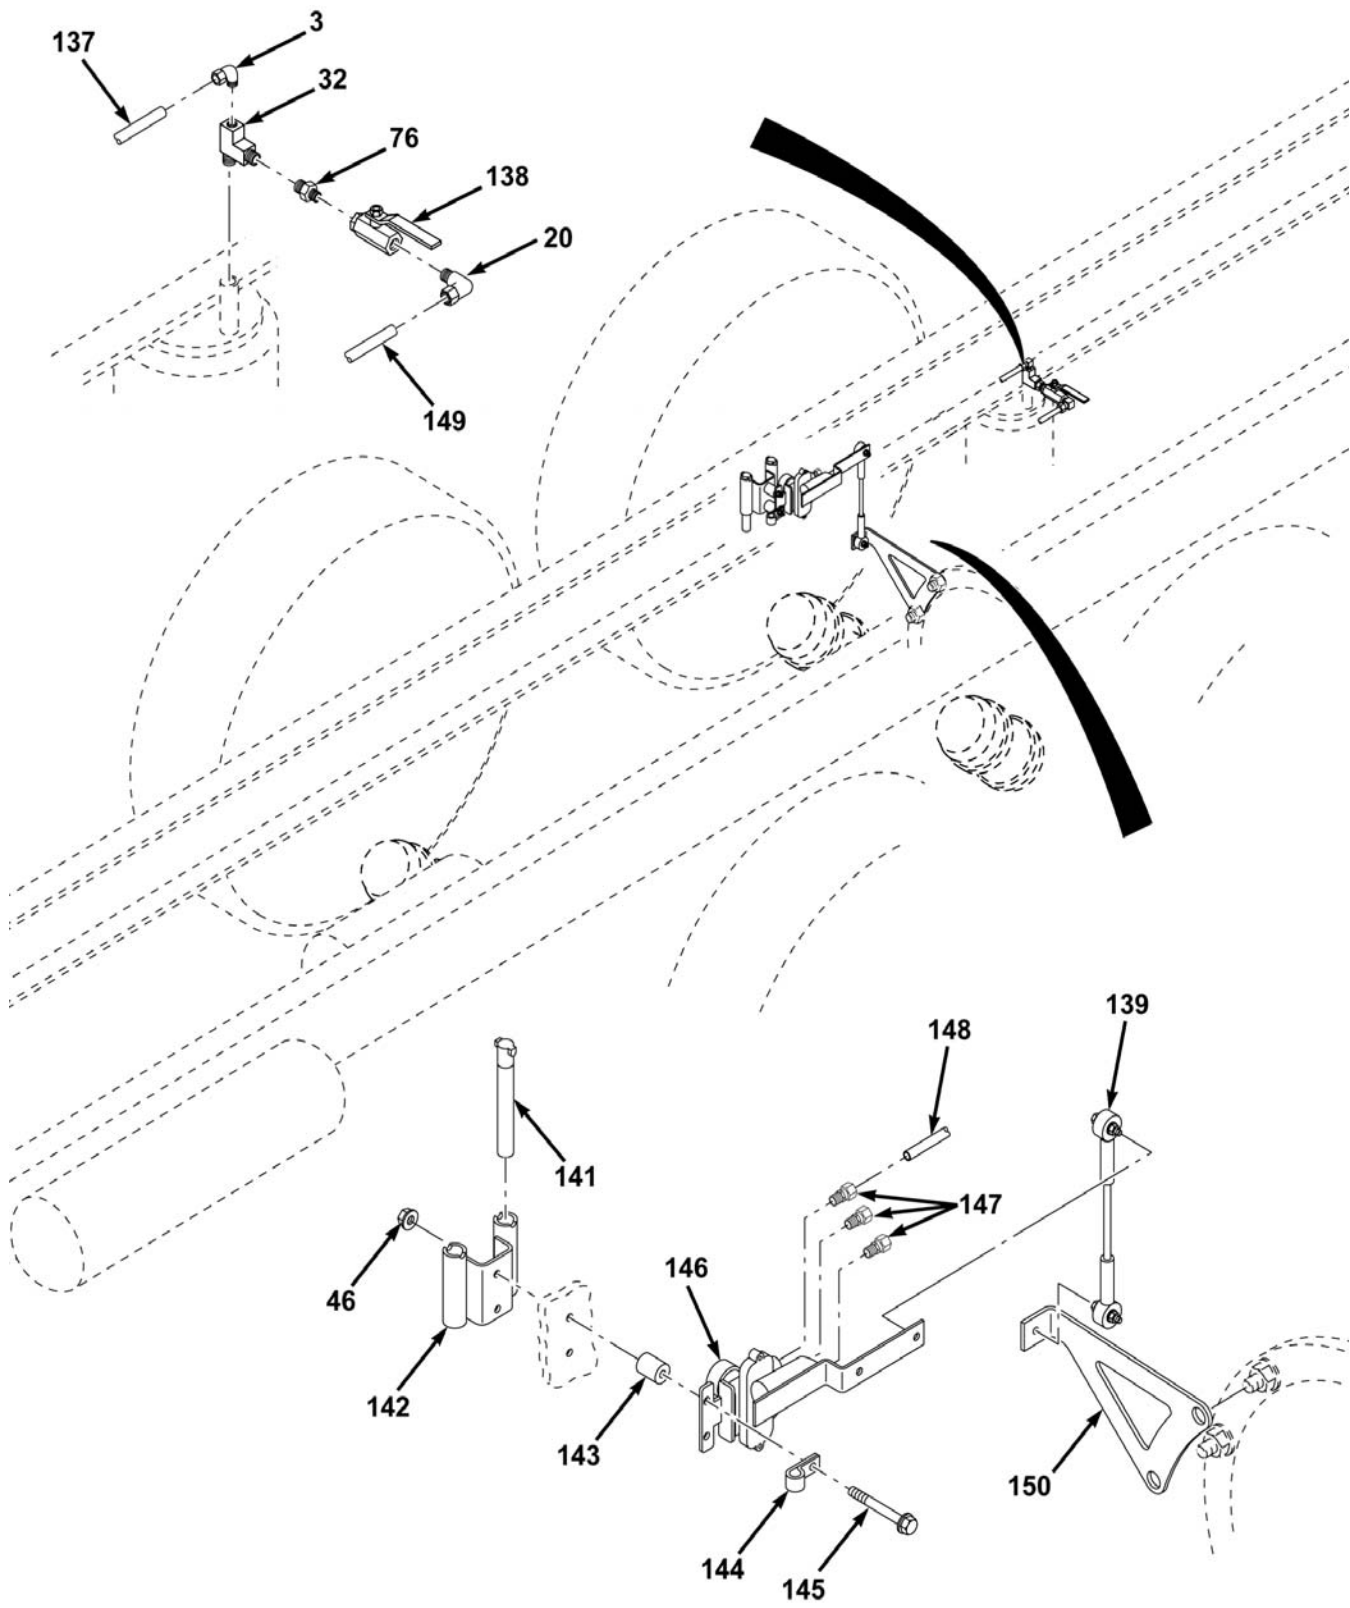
CHASSIS AIR (SHEET 9 OF 15)
